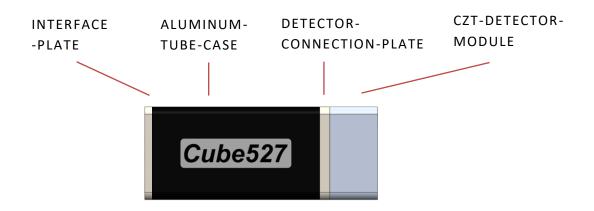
CUBE527 SECTIONS (SIDE VIEW)
